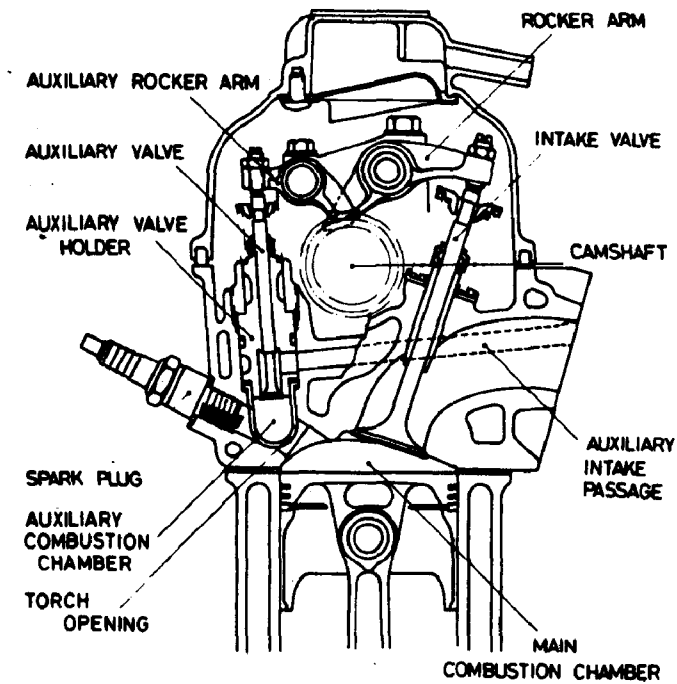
Cutaway of Honda CVCC cylinder head (Ref. 4-9)
